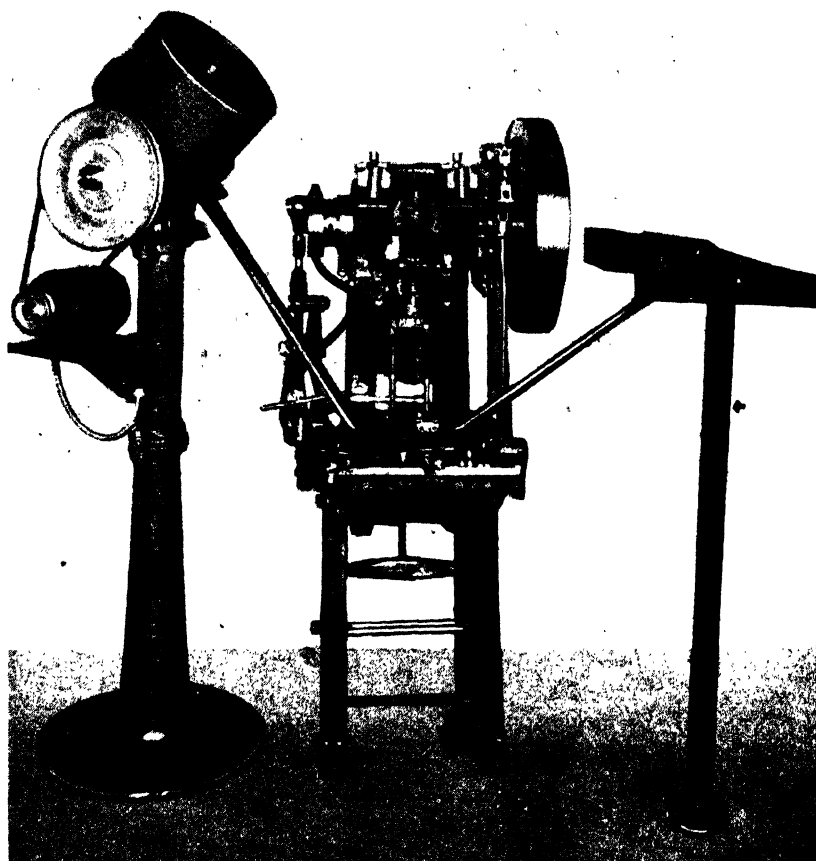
A dial-feed setup with auxiliary hopper and slide feeds in which over 7,000 square nuts with steel jackets are assembled hourly. (Courtesy of F. J. Littell Machine Co.)
